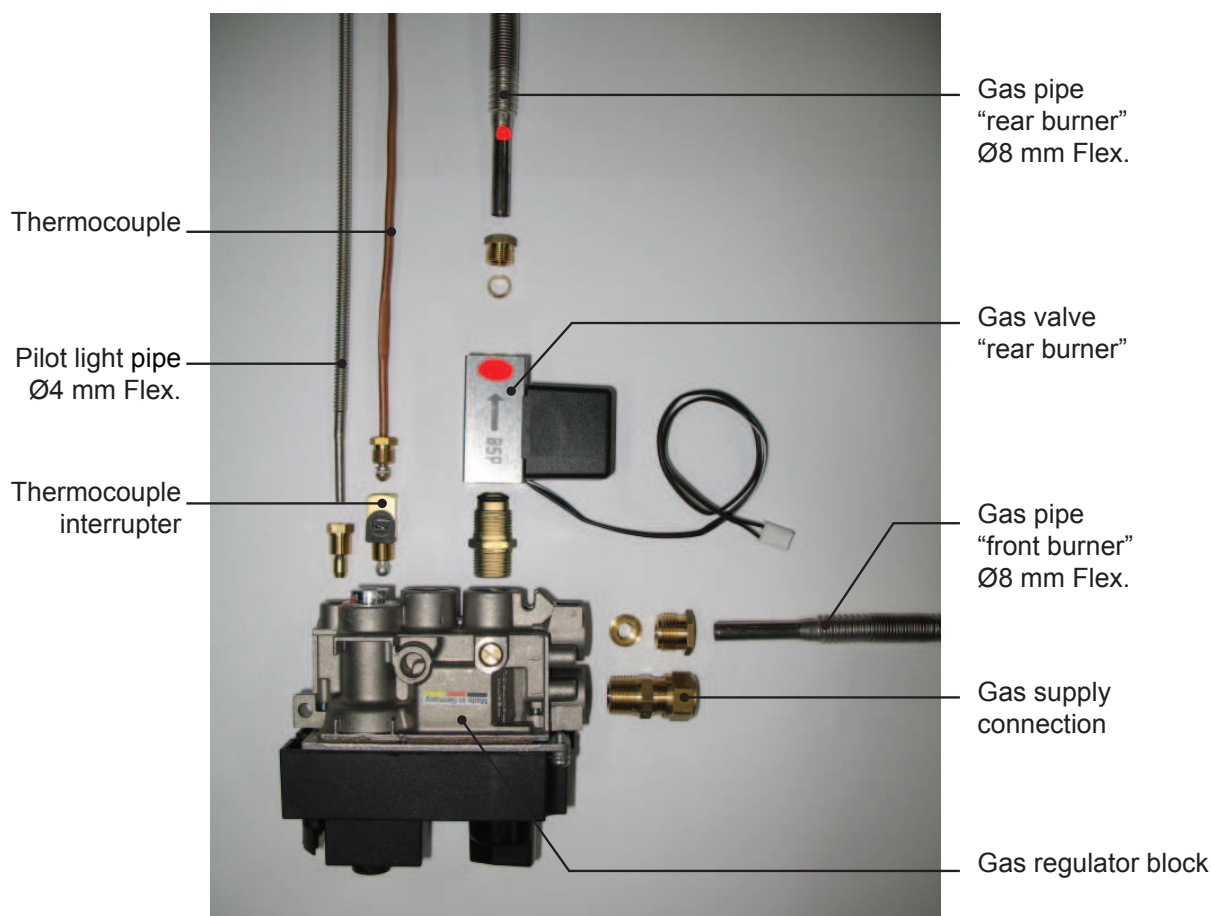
Gas regulator block and gas valve: Gas and thermocouple connections
